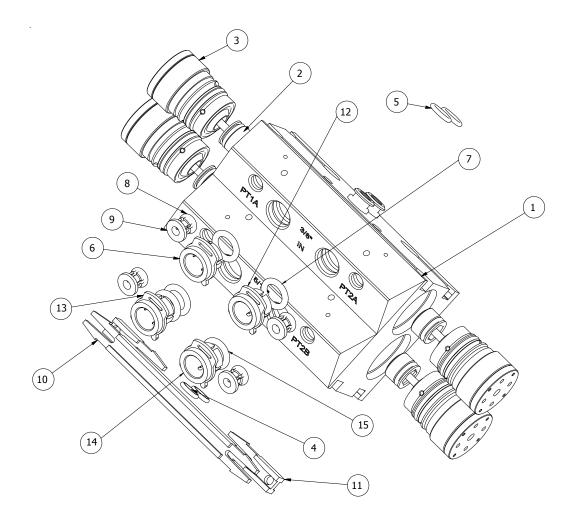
A10981 Dual Purge Circulating Assembly (English)
